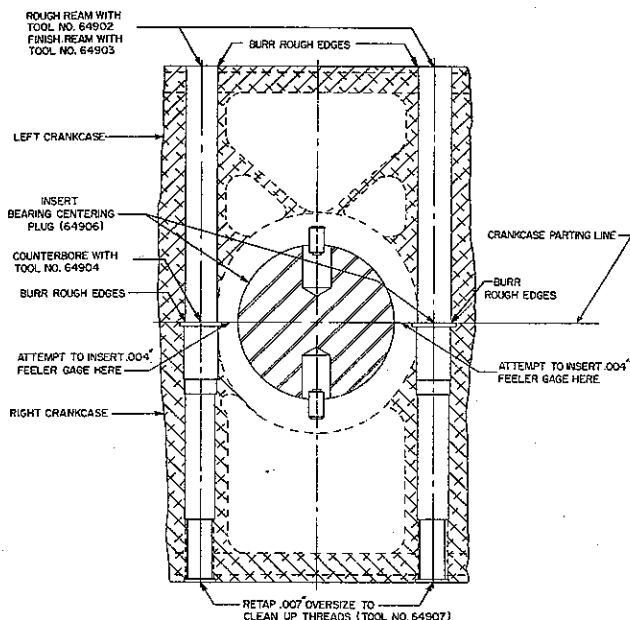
Cutaway of Crankcase Showing Steps to Install Body Fit Bolts
